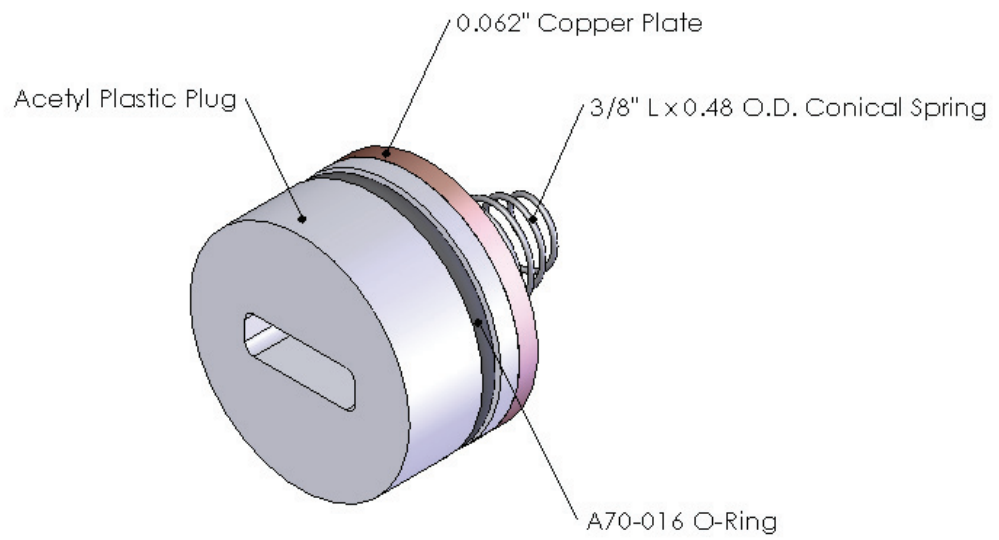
An annotated isometric view of the solid model assembly *battery plug.asm
